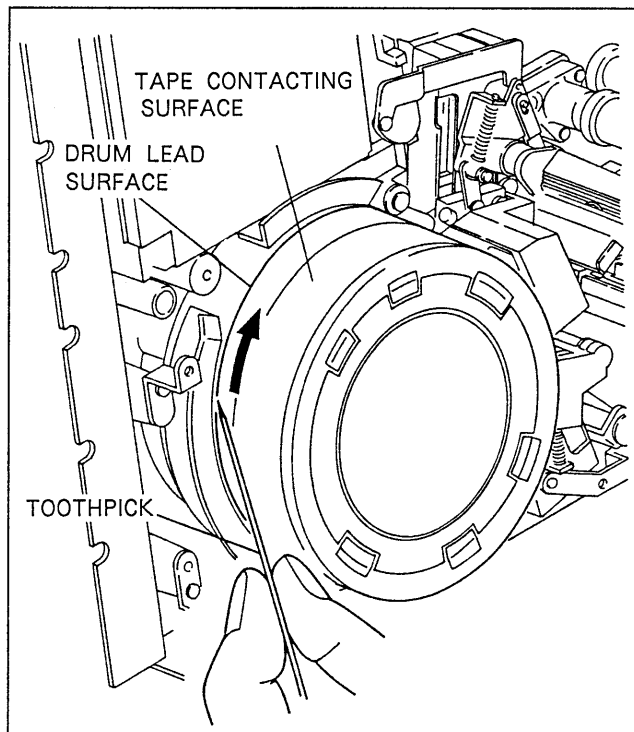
Cleaning of Cylindrical and Lead Surfaces of Lower Drum
